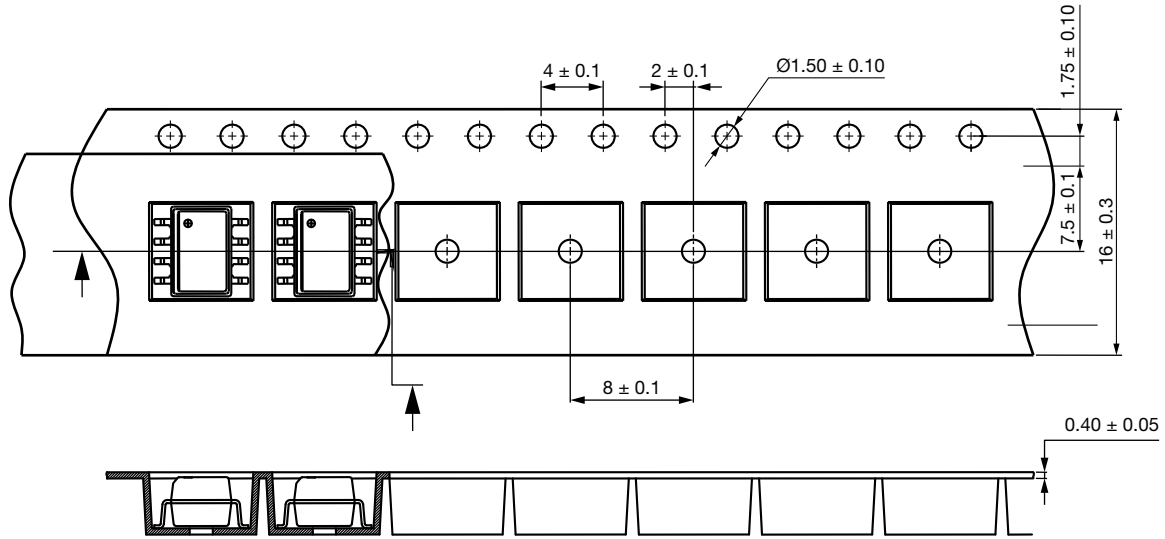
Tape and Reel Packaging (2000 pieces on reel)
